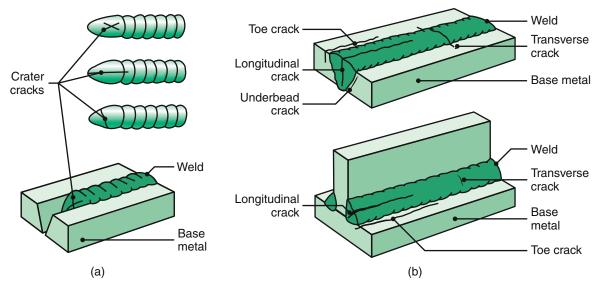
Types of cracks developed in welded joints. The cracks are caused by thermal stresses, similar to the development of hot tears in castings, as shown in Fig. 10.12.
